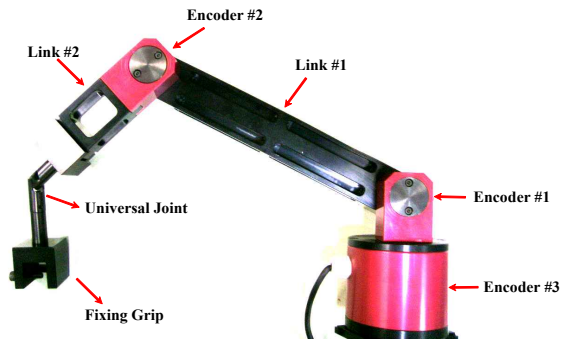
Development of real-time welding distortion measurement equipment
